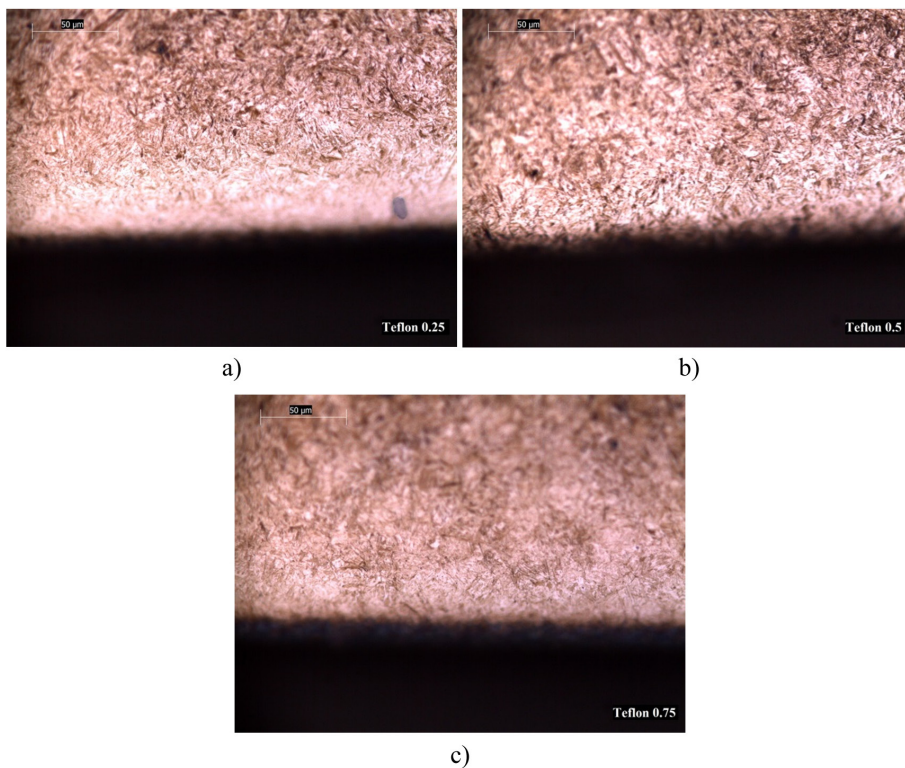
Optical microscopy of ground surfaces for MQL with cleaning by Teflon block ($500\times$ magnification). a) 0.25 mm/min. b) 0.50 mm/min. c) 0.75 mm/min.
